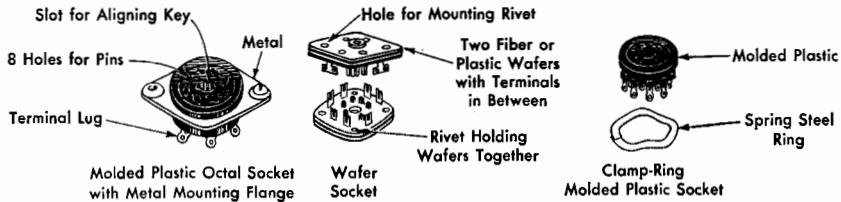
Common types of octal tube sockets. The wafer socket is most widely used
